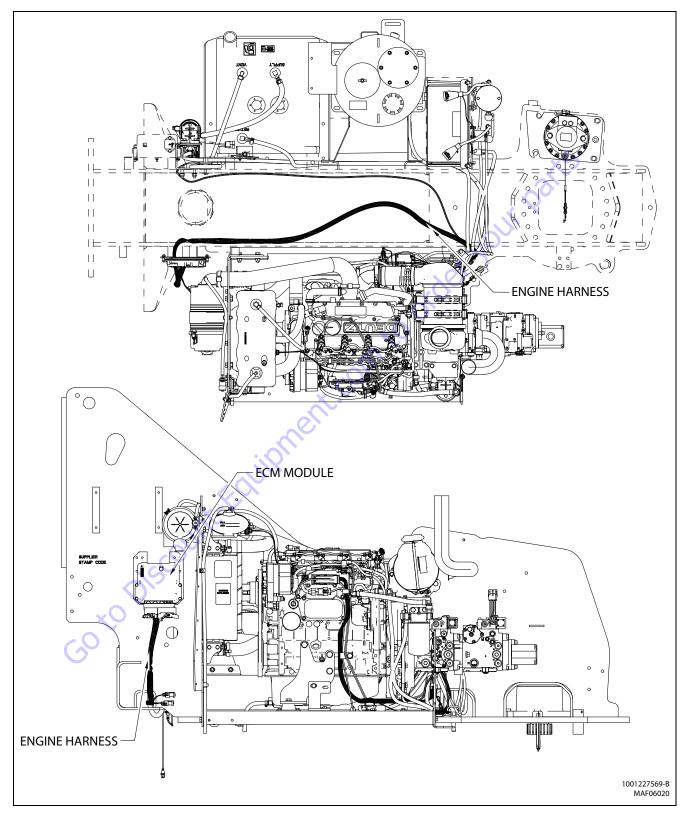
Deutz Engine (D2.9L4) - T4F (Sheet 3 of 4)
